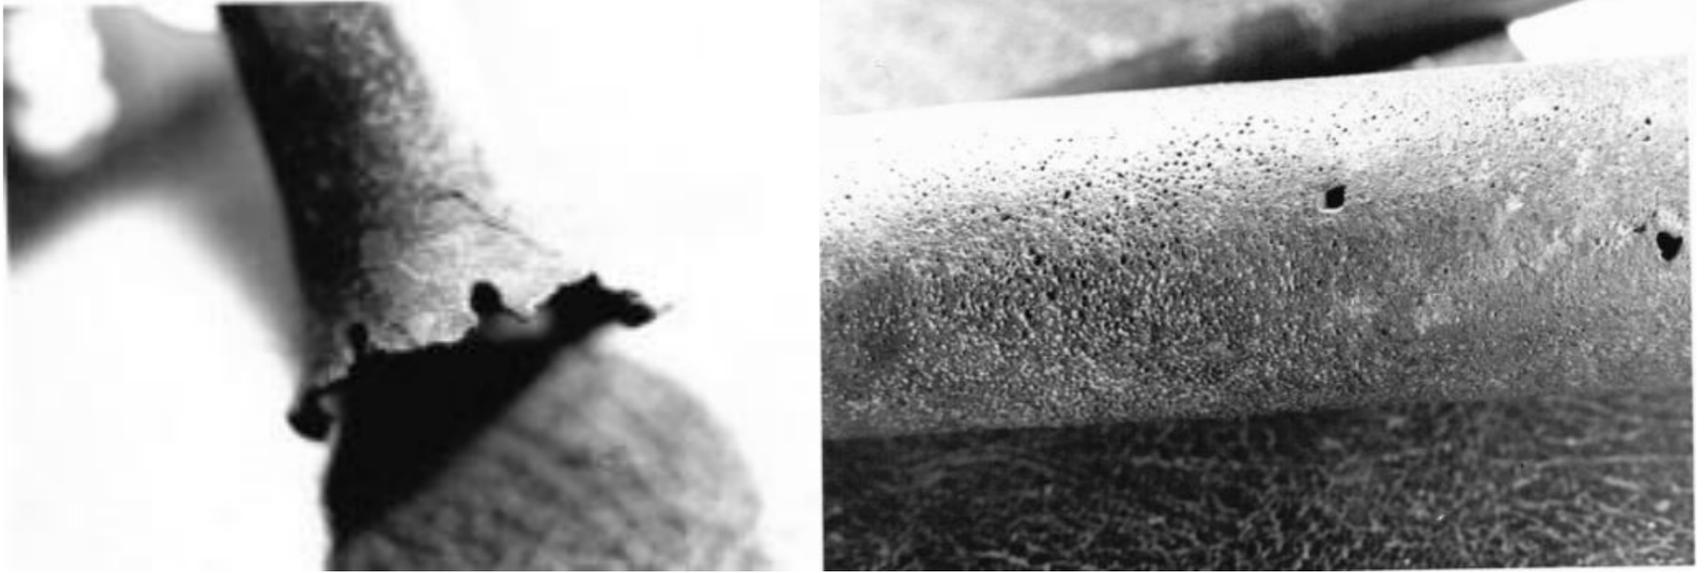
Post-Casting Work on a Tube and Tube Surface Finish
